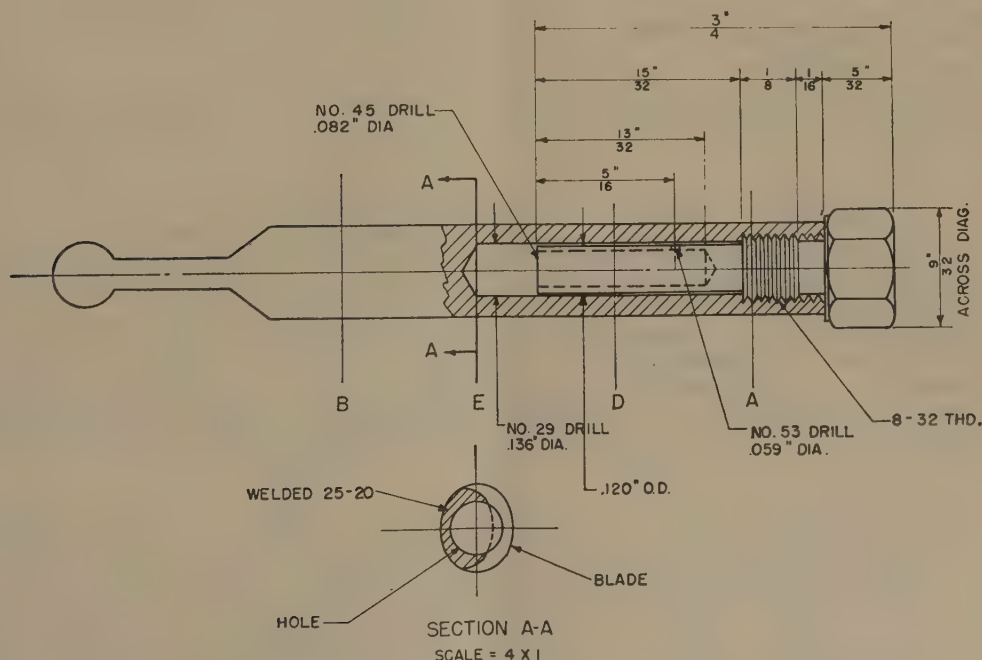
CAPSULE MOUNTED IN END OF TURBINE BLADE FOR HOLDING TEMPERATURE-INDICATING POWDER OR ALLOY
